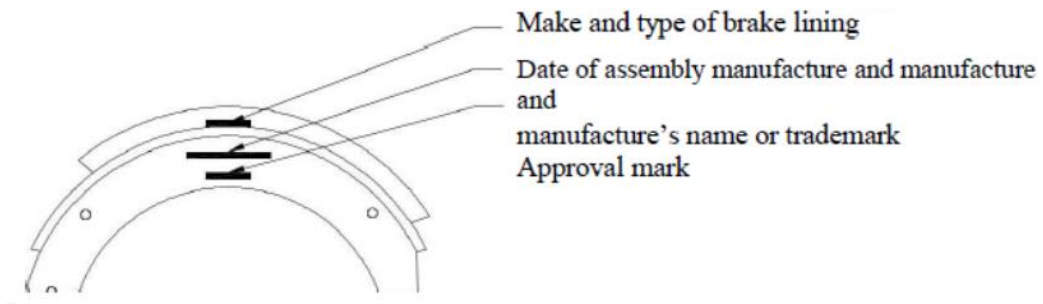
EXAMPLES OF SHOE ASSEMBLY MARKING
